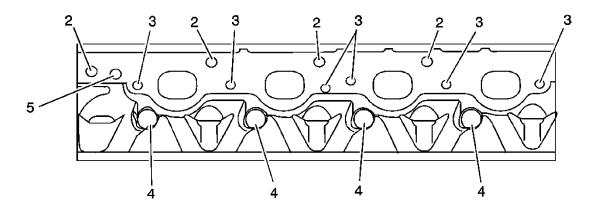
Cylinder Head - Intake/Exhaust Side Views Courtesy of GENERAL MOTORS CORP.
